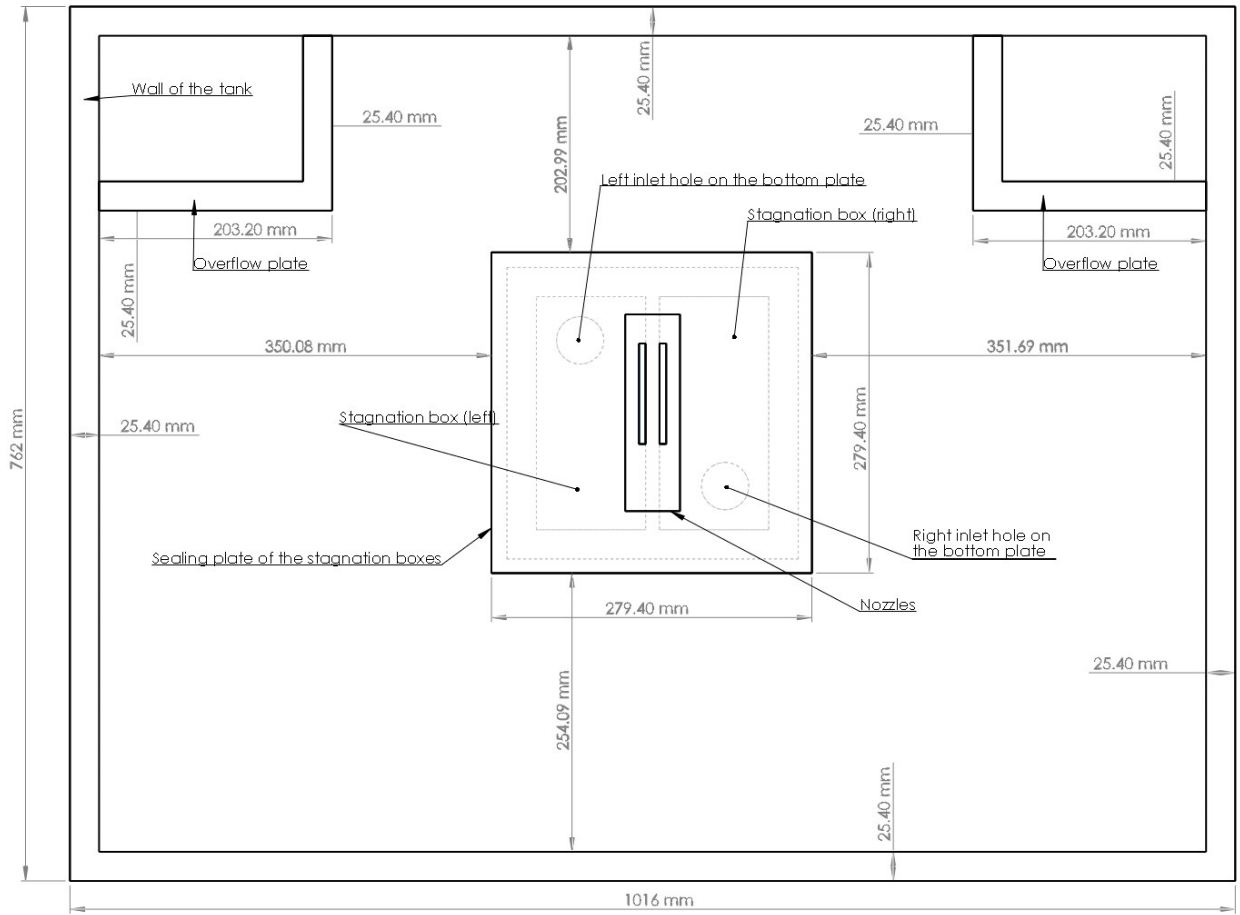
A Top View of the Tank Along With the Corresponding Dimensions.
